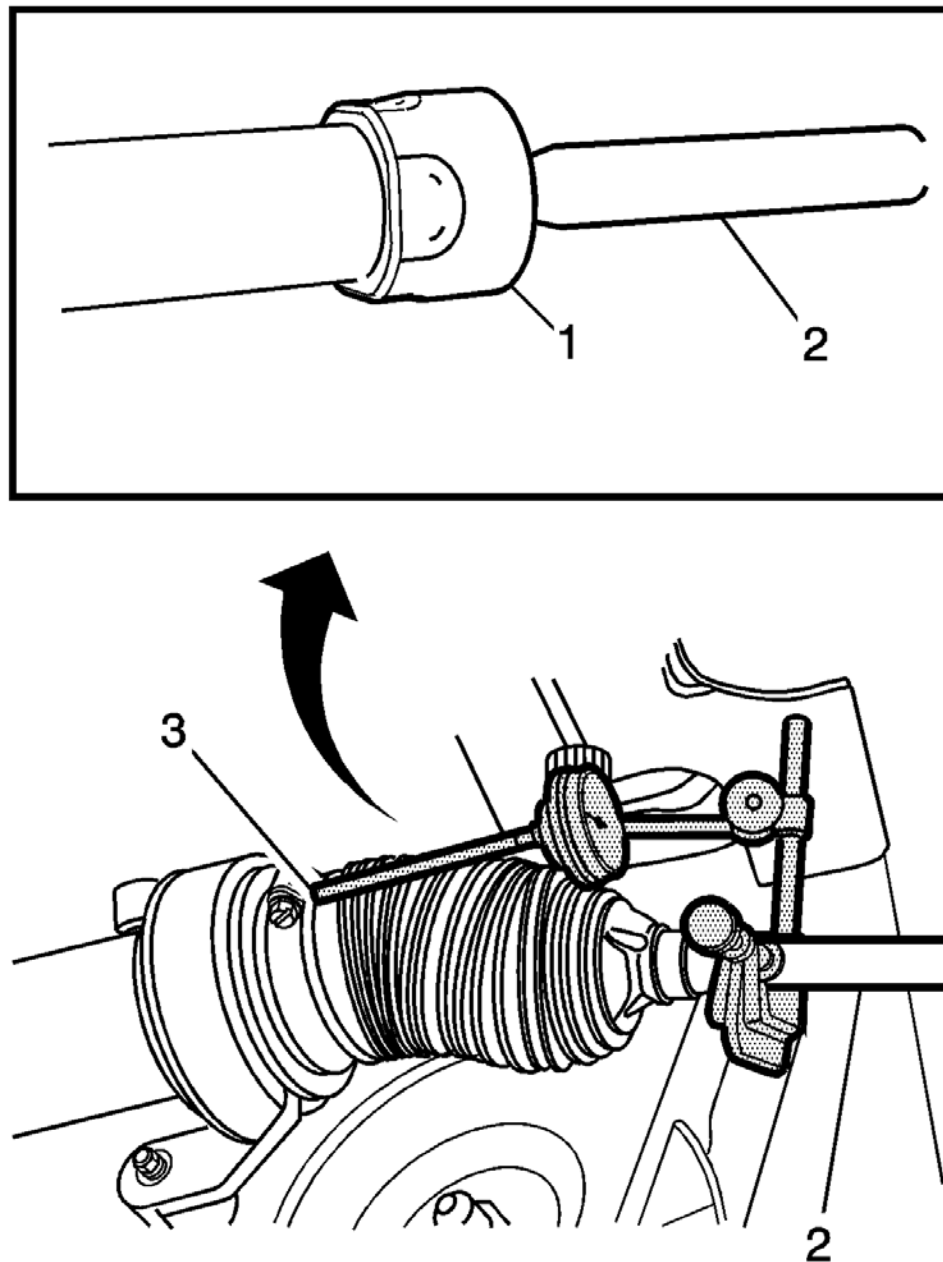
Measuring Lash Between Inner Tie Rod And Steering Gear Housing
